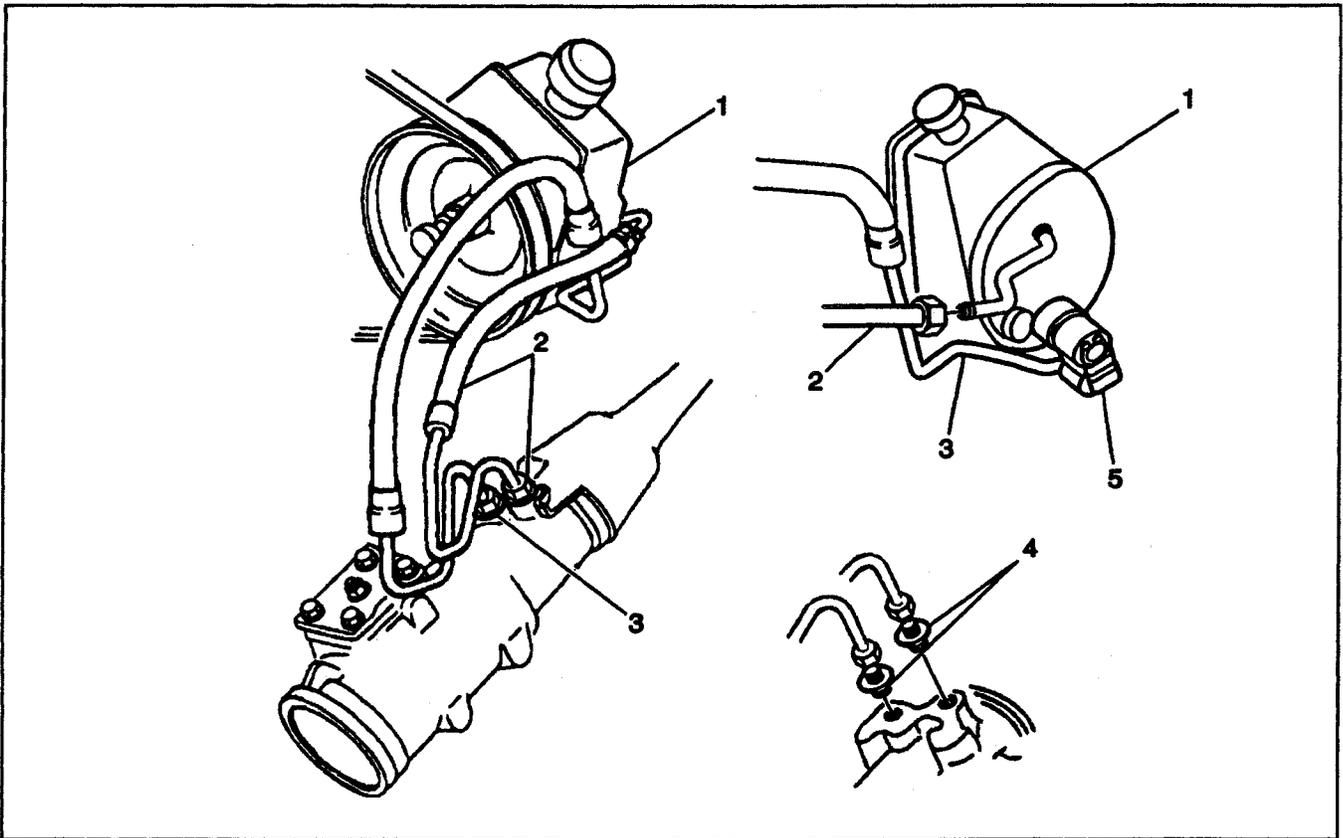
Power Steering Pump Mounting (6.5L Diesel Engines)
